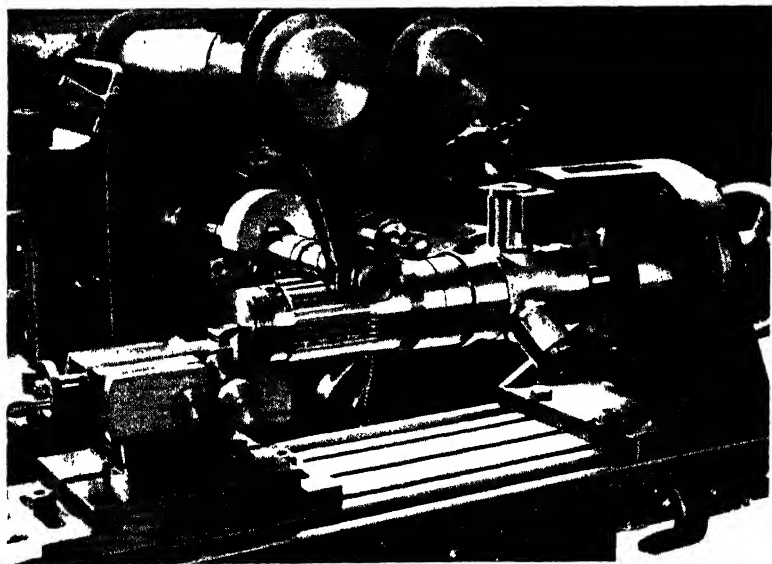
Milling the Splines on an Airplane Propeller Shaft
